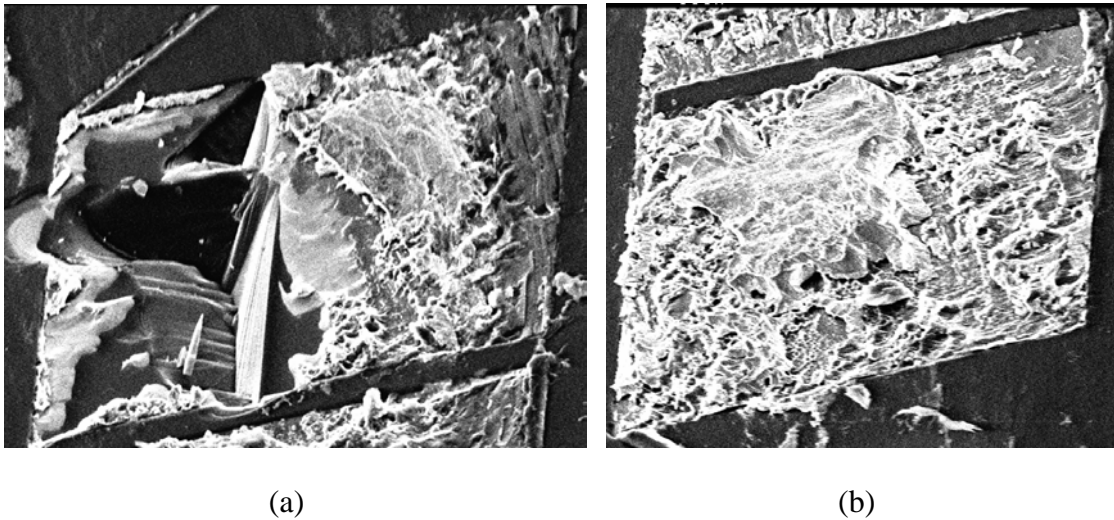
(a) Fracture surface showing cratering defect for a longitudinal bonding and (b) fracture surface for a typical transverse bonding.
